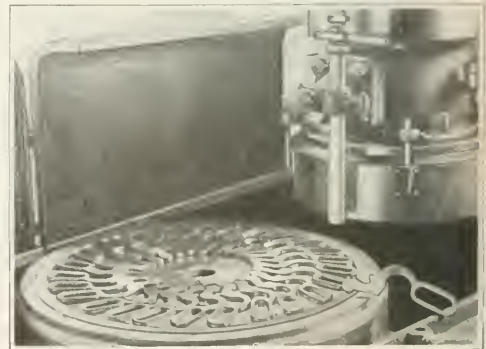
Method of holding and grinding Lever for Repeating Rifles shown in Fig. 20, on a Blanchard Vertical Surface Grinder
